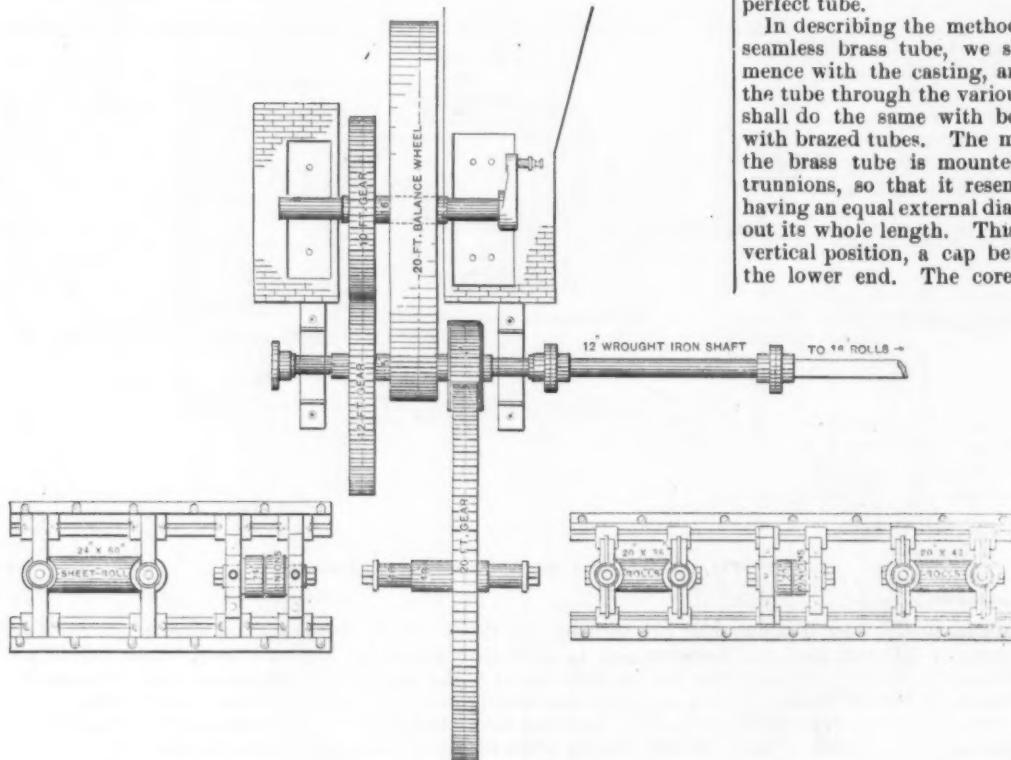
Plan, Showing Arrangement of Engine, Gearing and Rolls.
